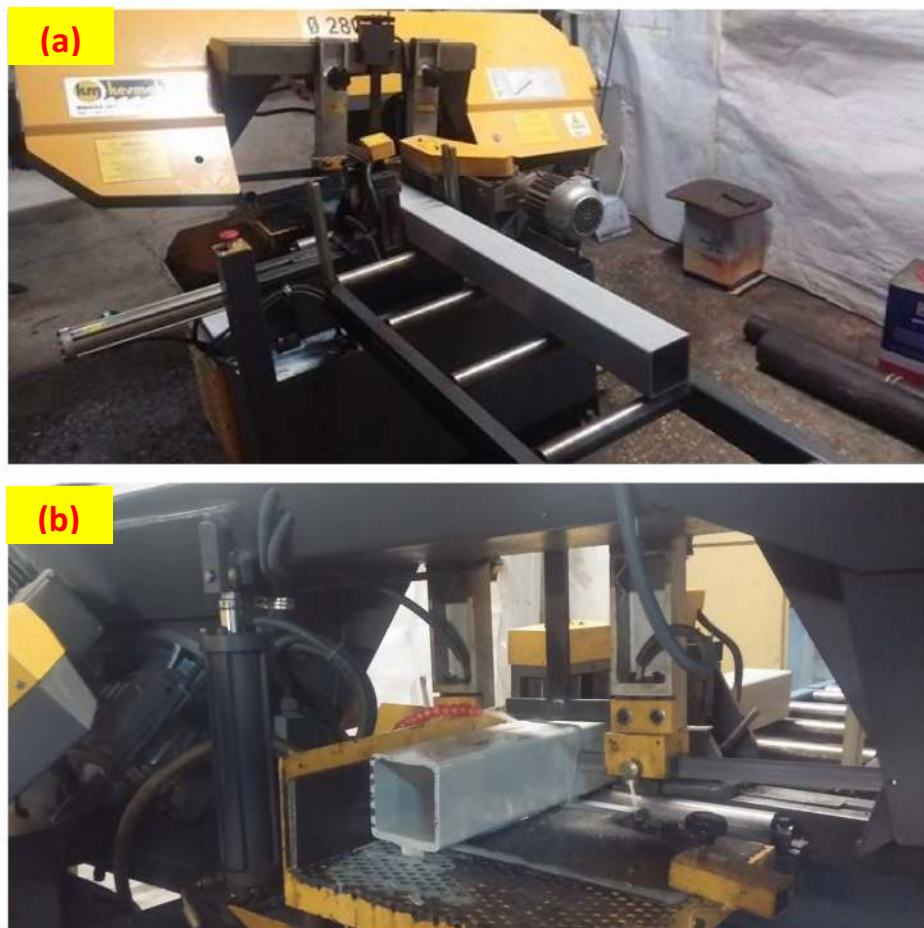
Cutting process GFRP tubes by machine (a) & (b)
